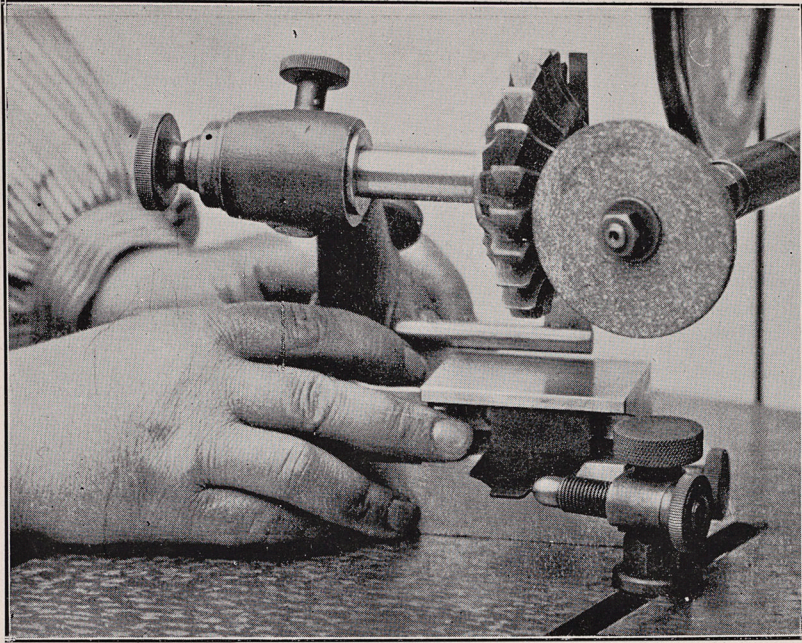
Grinding a Gear Cutter same as in Fig. 11.
